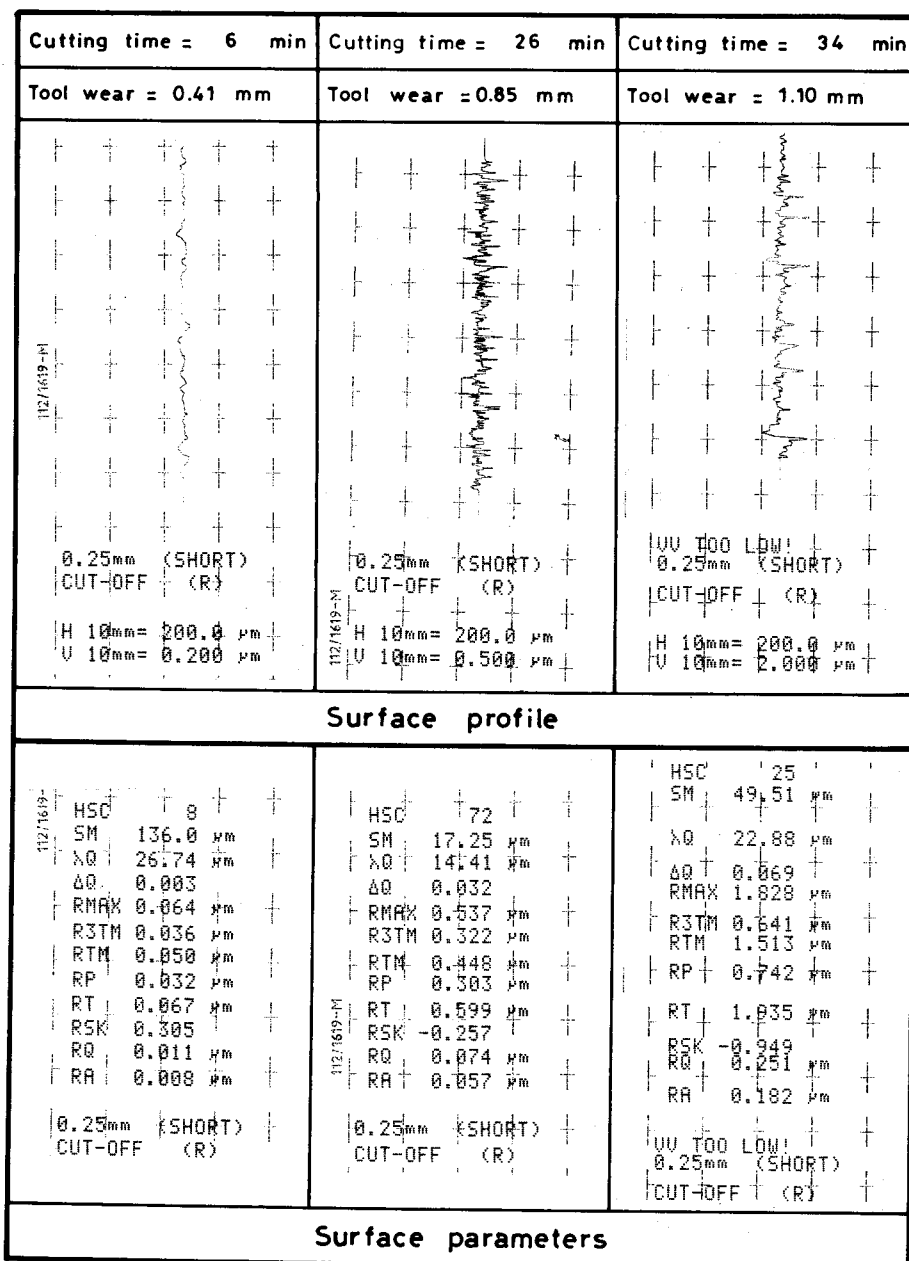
Data of the machined surface at a cutting speed of 120 m/min, feed rate = 0.05 mm/min, depth = 2 mm.
